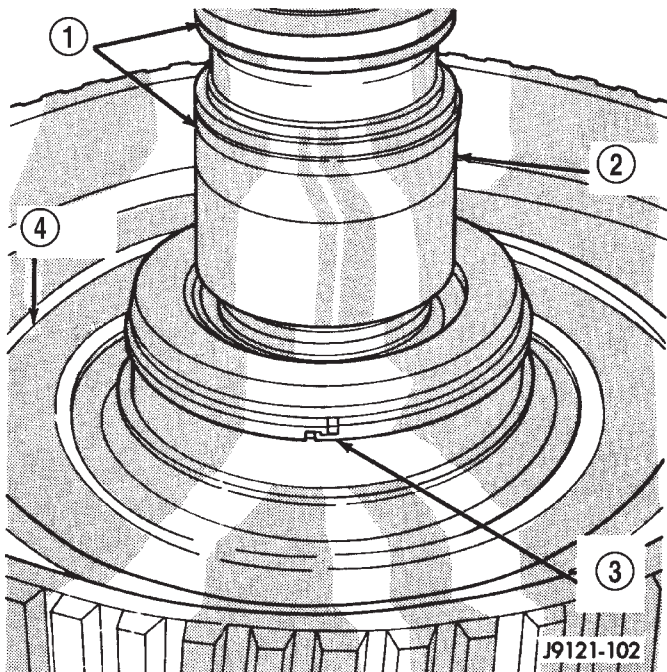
Input Shaft Seal Rings And Thrust Washer
